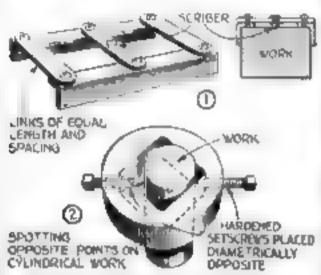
is a tool for ecribing a center line. Fig. I is used for location points as round stock
